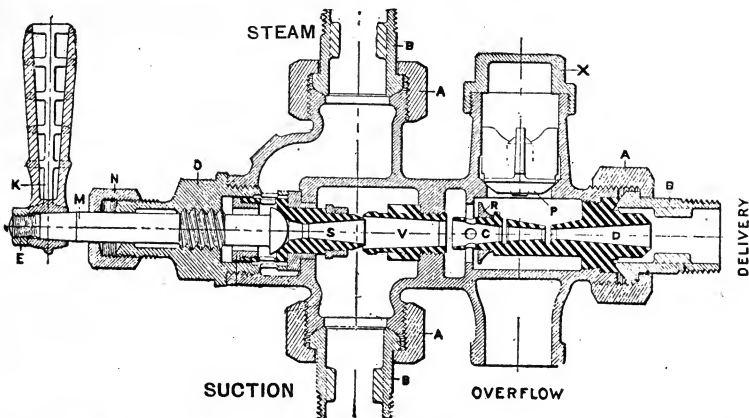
,800.—Metropolitan single tube sliding nozzle lifting automatic injector. *The parts are:* S, sliding steam nozzle; V, lifting tube; C and D, combining and delivery tubes; R, auxiliary check valve; P, overflow valve; O, steam plug; M, steam valve and stem; N, packing nut; K, steam valve handle; A, coupling nut; B, tail pipe; X, overflow cap; E, nut for stem M. *In construction a sliding steam nozzle is provided. In operation when this nozzle is in the forward position enough water will flow in to work from 25 to 90 lbs. For pressures above 90 lbs., turn handle K, until the nozzle is drawn to its extreme backward position which will admit sufficient water for pressures up to 150 lbs.
